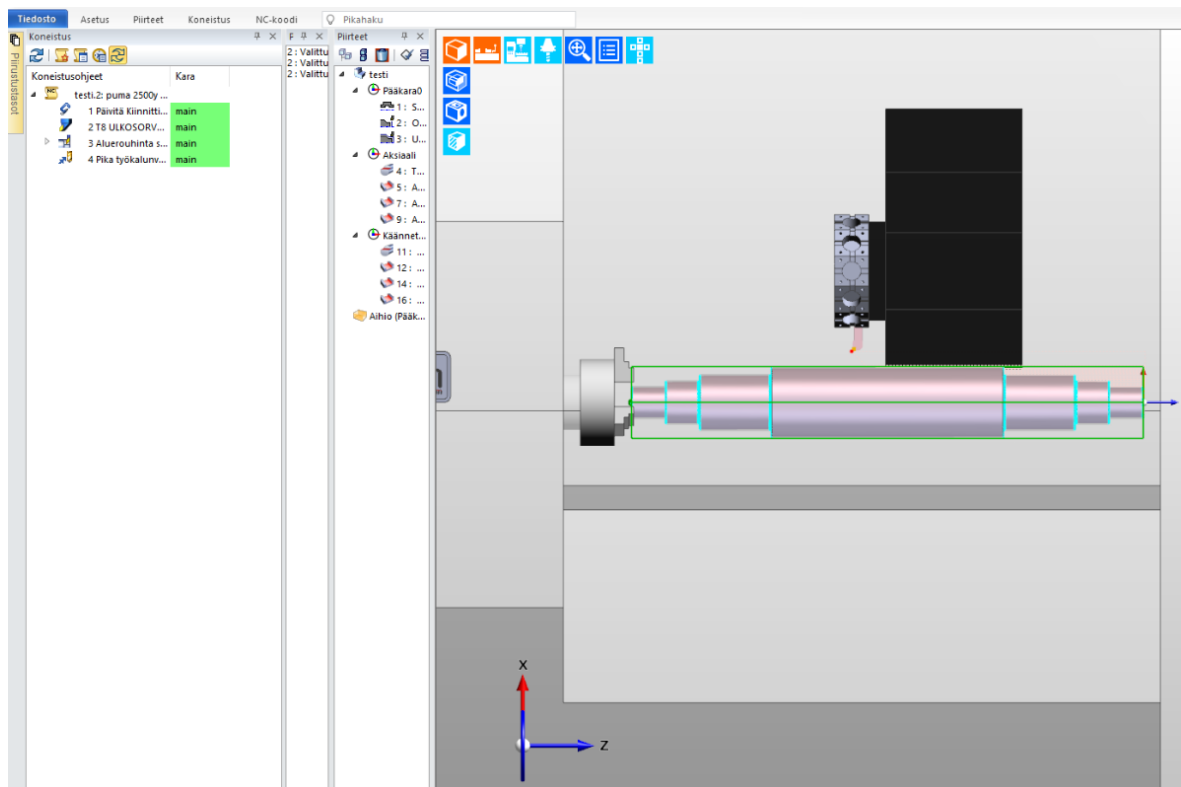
CNC lathe turret with cutting tool and workpiece with outline on original size in Edgcam 2018.
